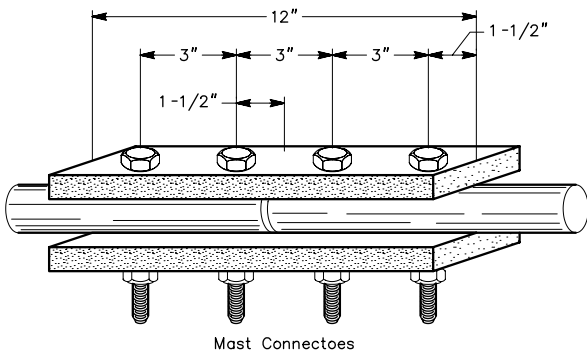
Mast coupling connector details for the portable quad. The plates should be drilled two at a time to ensure the holes line up.
